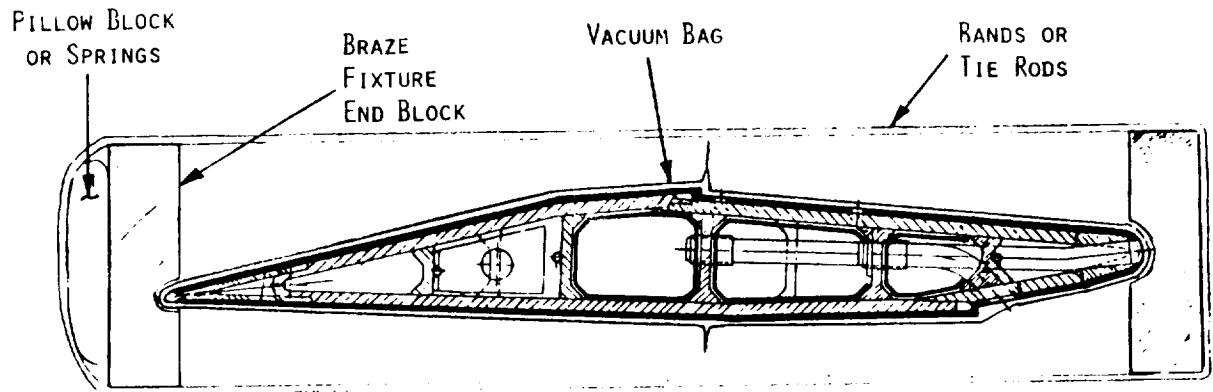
Design of Combination Hot-Sizing and Braze Fixture
